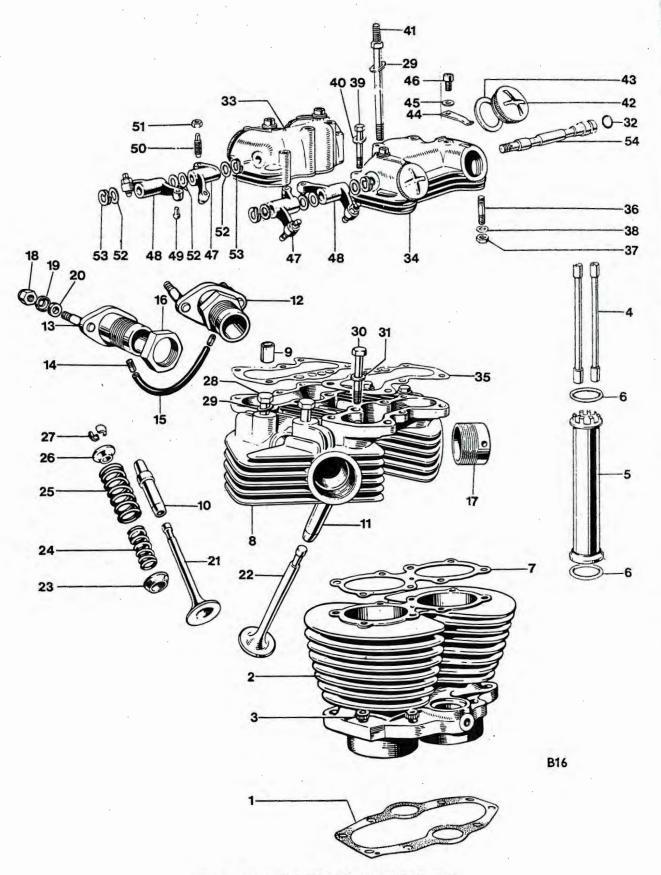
CYLINDER BLOCK AND HEAD, T120
